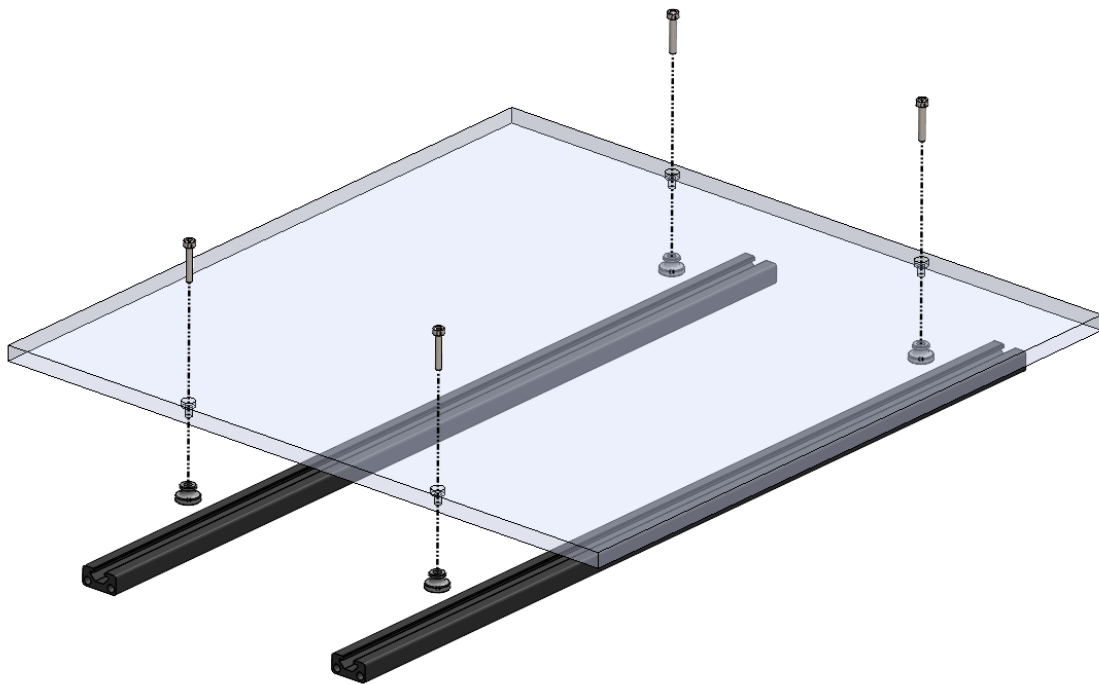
Heatbed base plate without wheels and showing aligned holes pairs.
